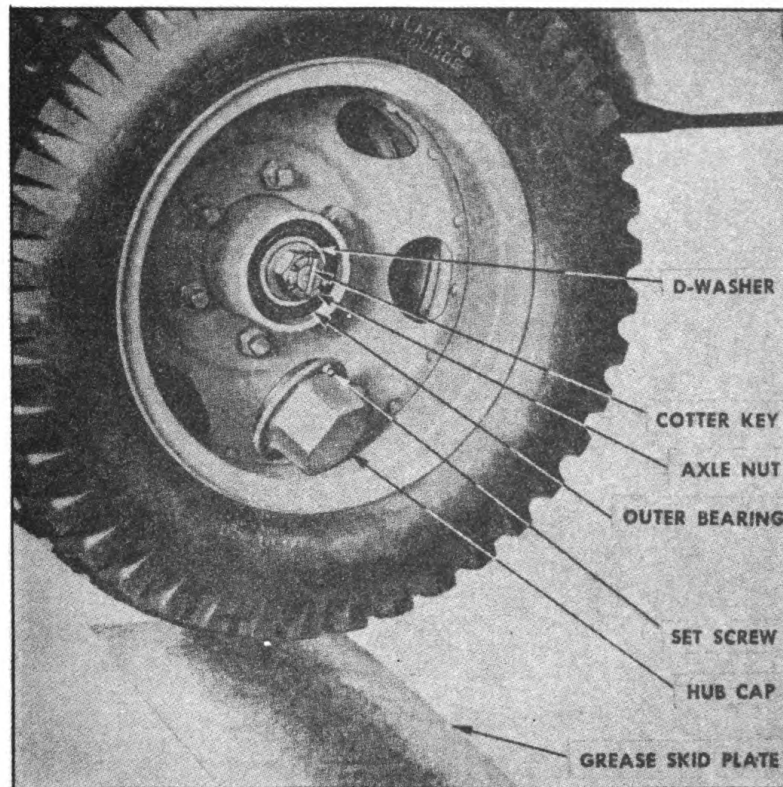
REAR OUTER WHEEL ASSEMBLY
